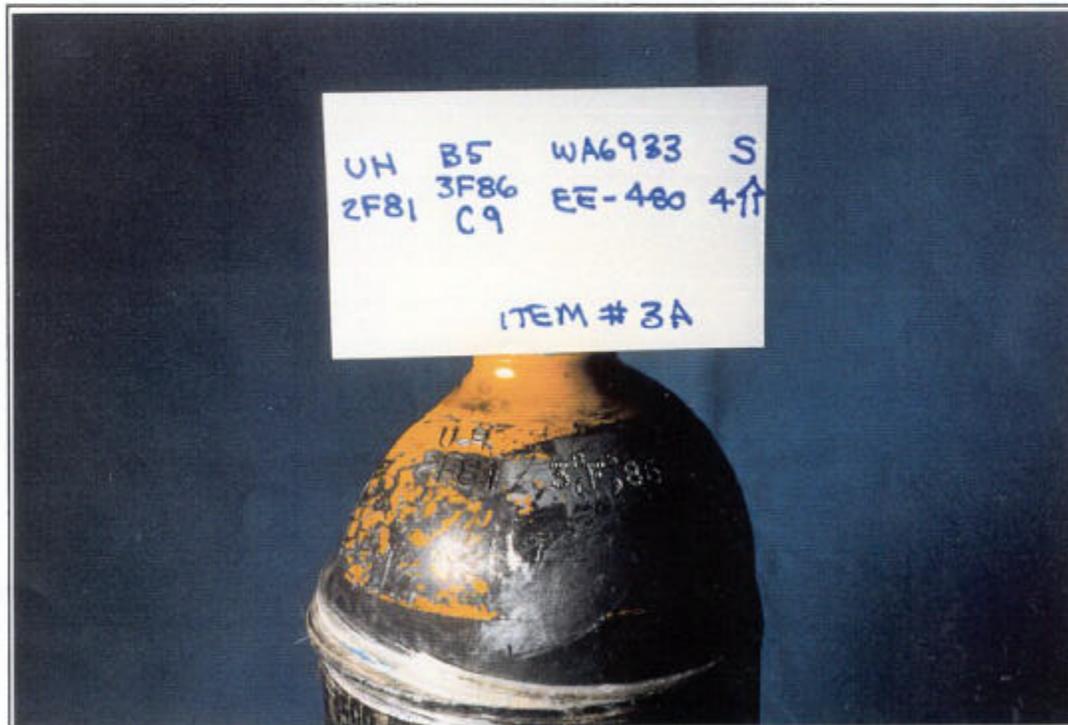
MARKINGS ON THE HEAD OF THE RUPTURED CYLINDER SHOWING THE DATE OF RETESTS -- ITEM 3A
